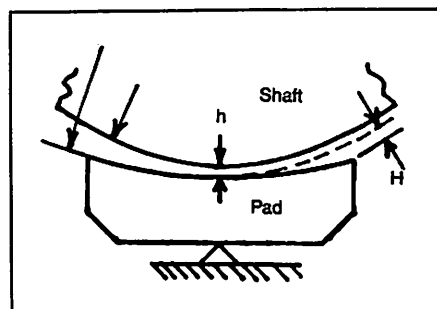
Guide-bearing pad clearances, with the "machined-in" clearance greater than the "assembled" clearance. This provides the pad surface with a "crown," or greater radius of curvature than the shaft. Crowning of the pad surface is essential for proper bearing operation. In the figure,  $h$  = minimum oil film thickness and  $H$  = "crown" height.
